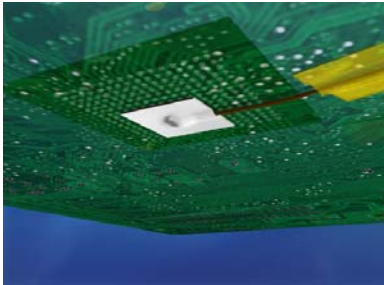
TC attachment on the bottom of the PCB directly underneath the BGA location
